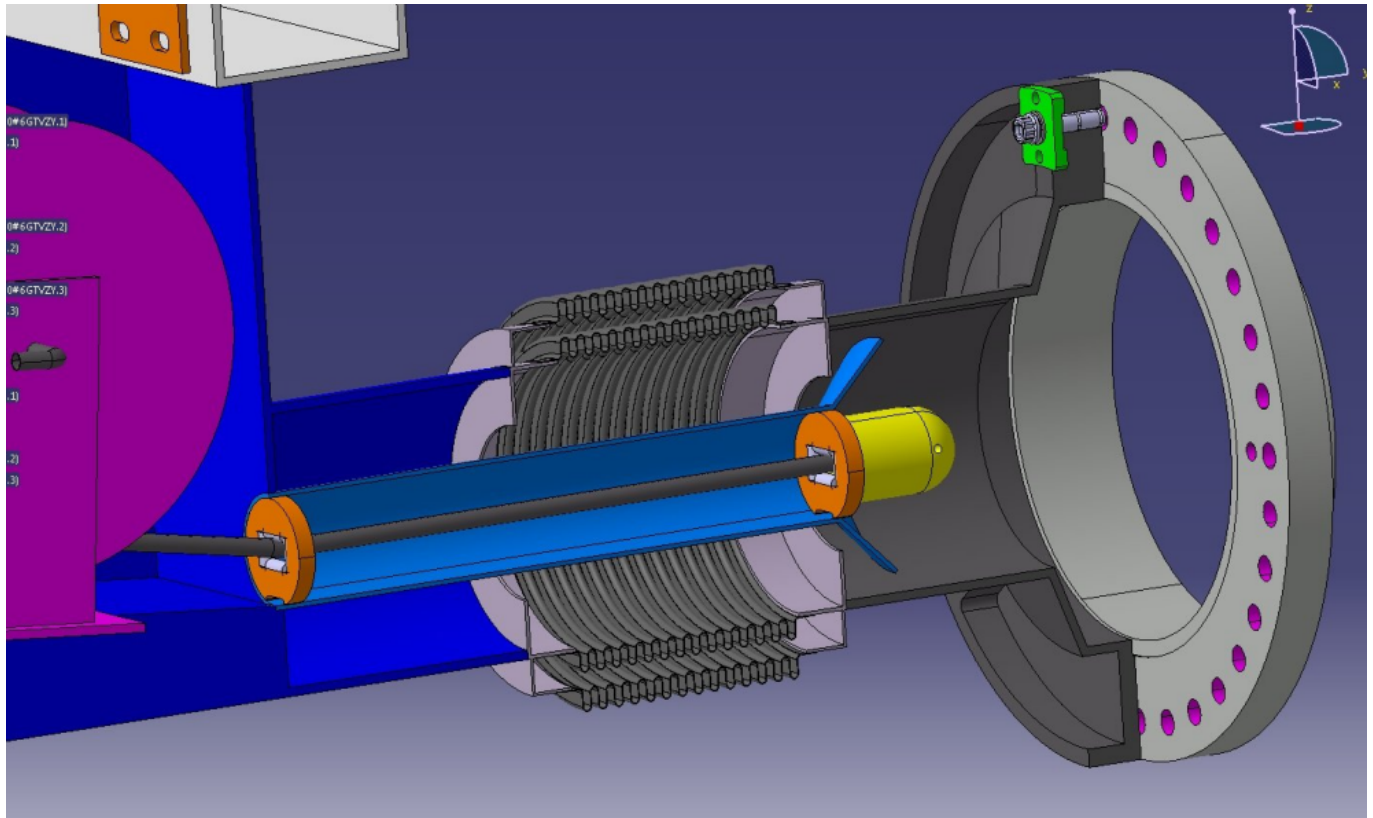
waterjet cleaning tool frontal section (DN500 setup)
